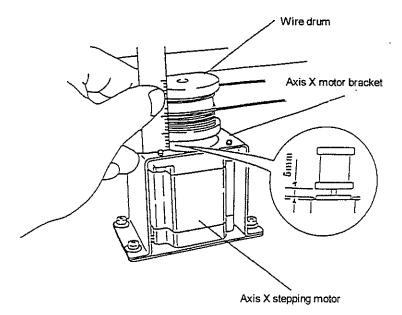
Gap between the Wire Drum and the Motor Bracket
